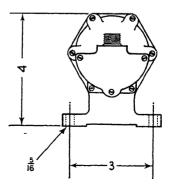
Installation diagram for electrical engine-speed indicator—generator
